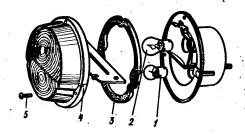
Side Light: 1 - side light bulb; 2 - turn indicator bulb; 3 - rubber seal; 4 - lens; 5 - screw
